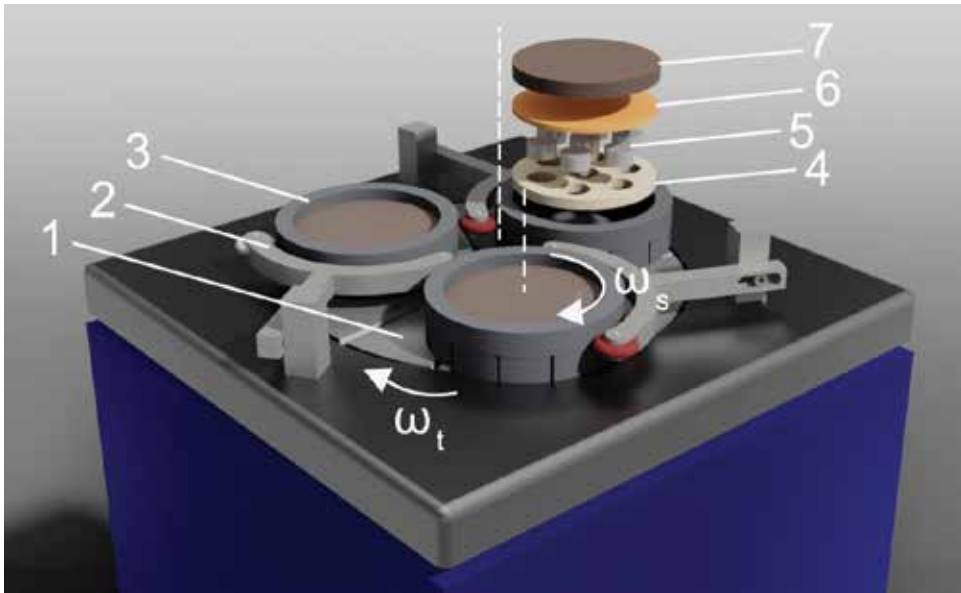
Single-sided lapping machine: (1) lapping plate, (2) roller forks, (3) conditioning ring, (4) separator, (5) workpieces, (6) pad, (7) weight.
